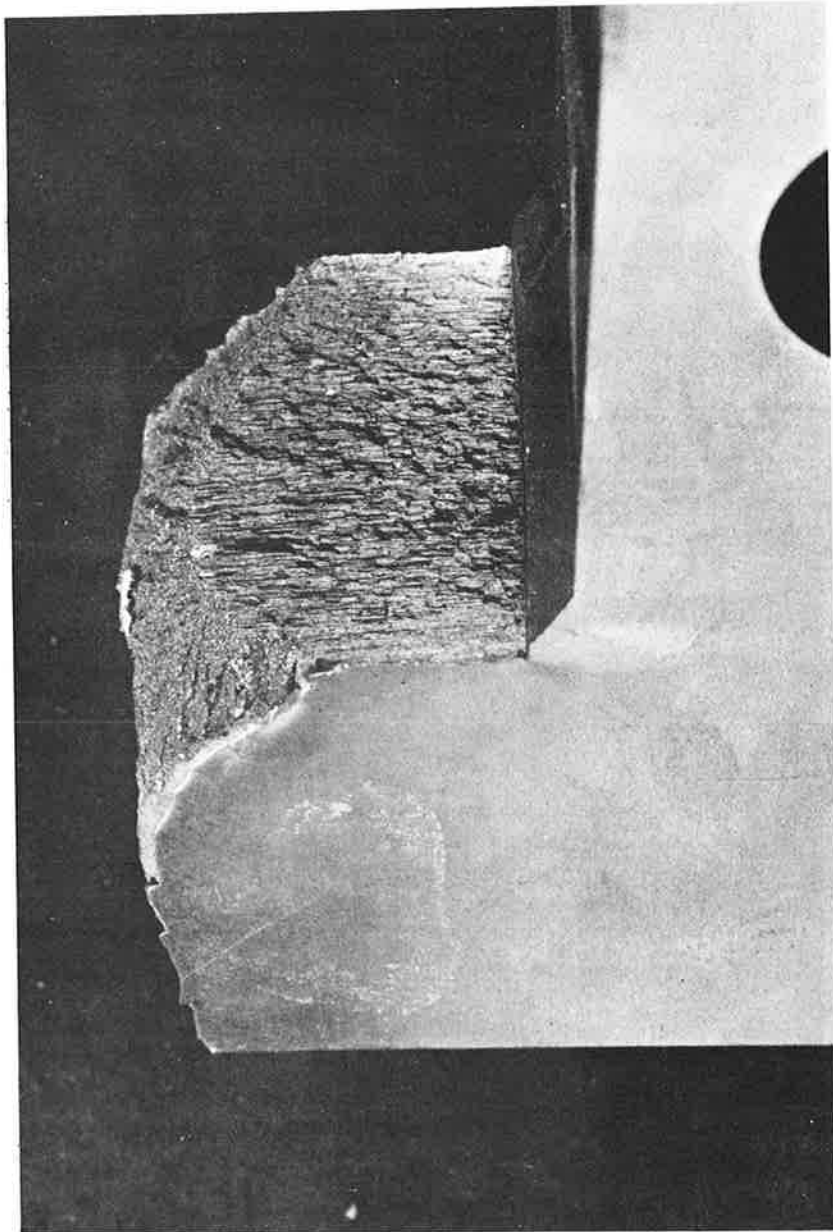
FRACTURE APPEARANCE OF COMPACT SPECIMEN FFG-KC1 TESTED AT 70° F
